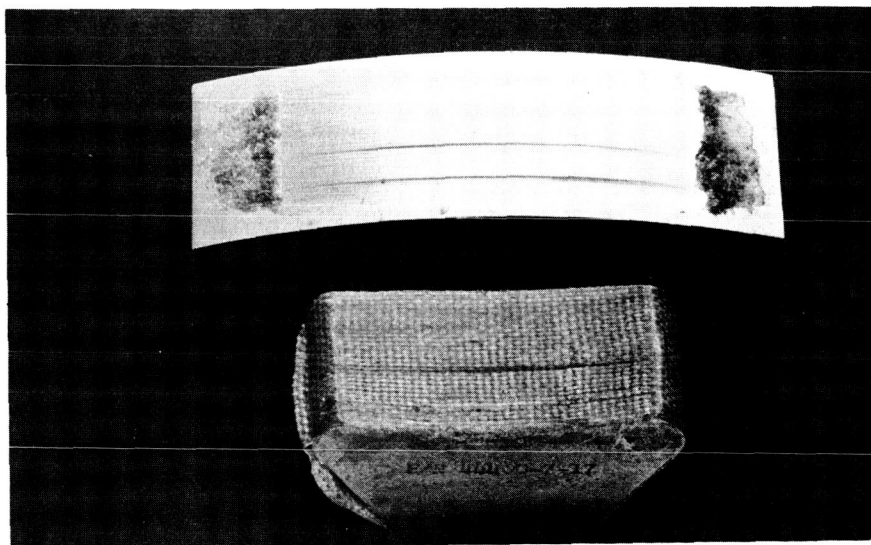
BALL JOINT TEST SPECIMEN TYPE - 17;
